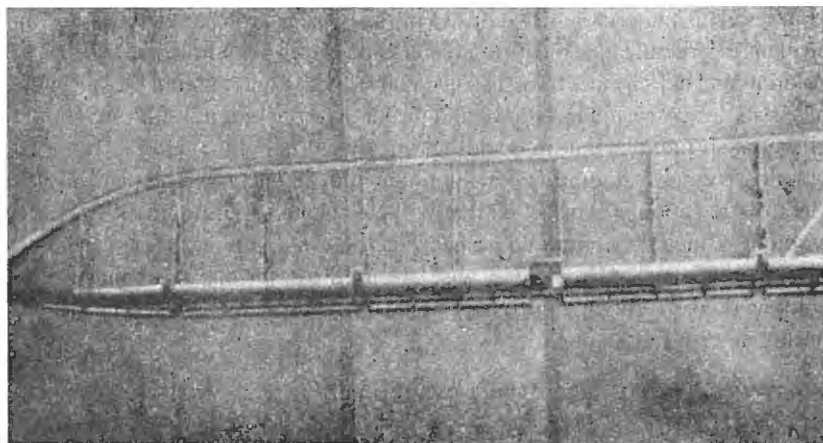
Aileron Construction; 18-8 Steel Spot Welded
